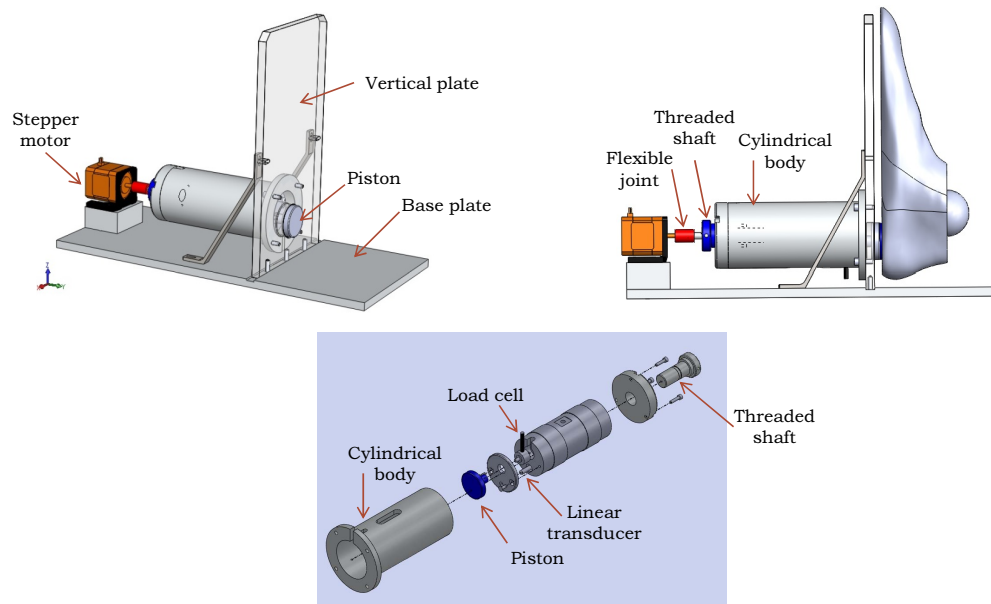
The compression device consists of a stepper motor connected to threaded shaft through a shaft and flexible joint.
